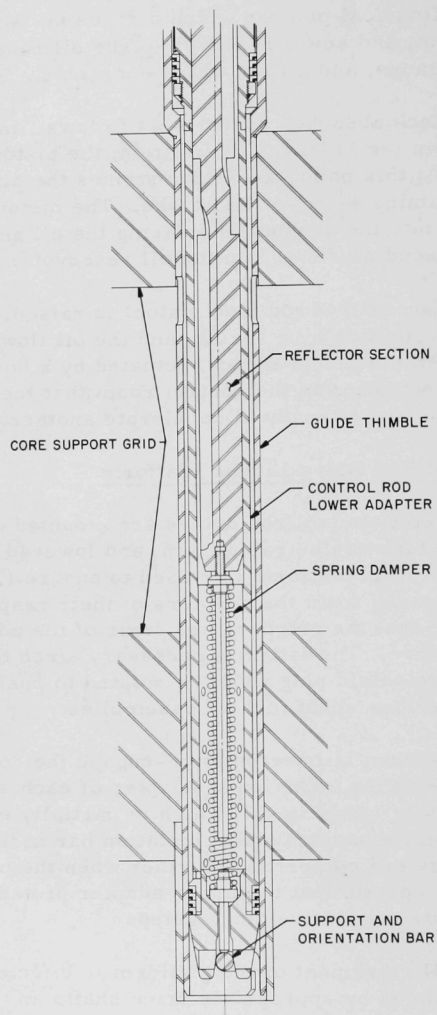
Spring Damper in Lower Adapter of Control Rod
